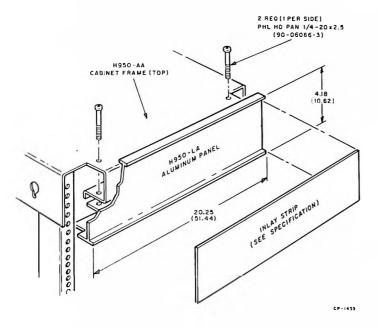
H950-LA Logo Frame Panel Mounting and Dimensions
